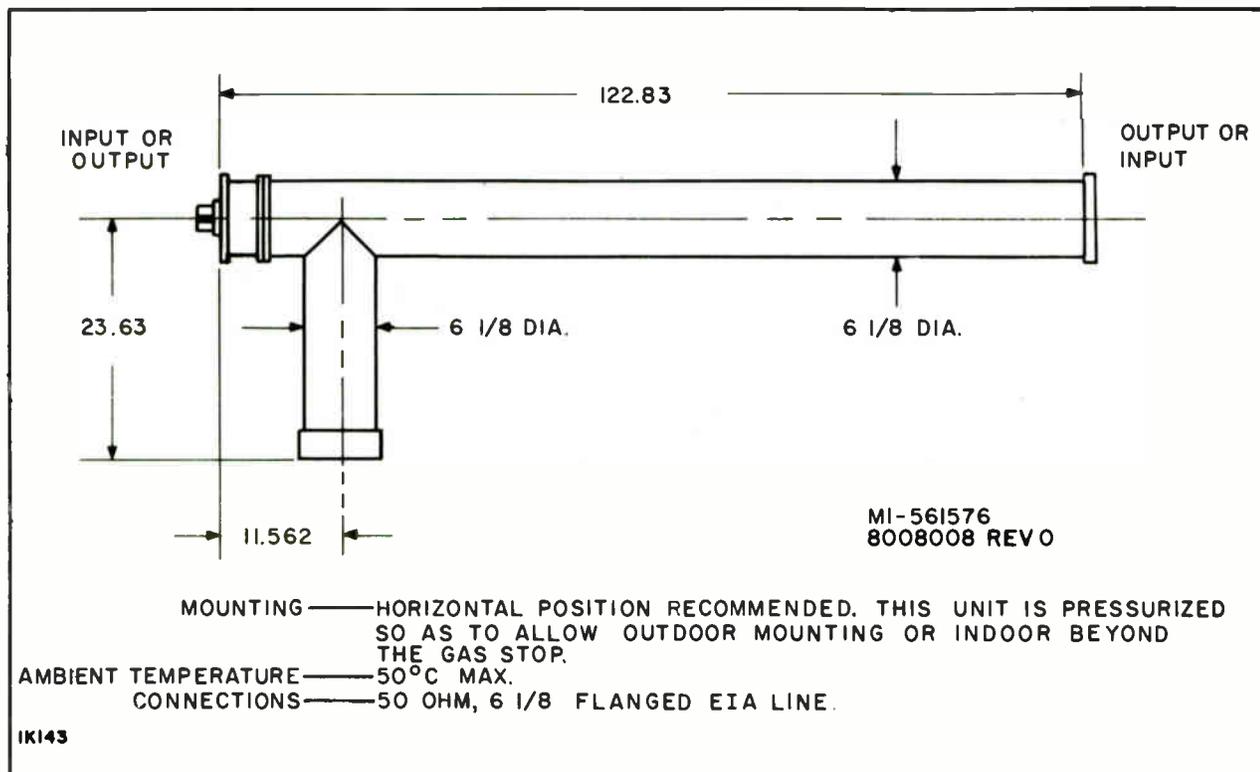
40 kW Harmonic Filter, Pressurized (MI-561576), Outline Drawing
